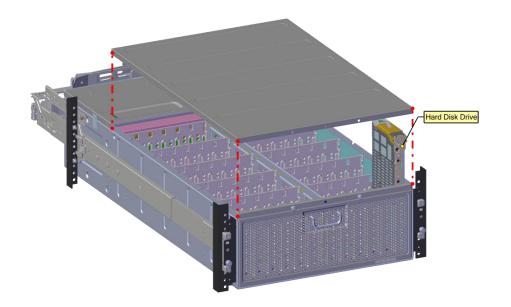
Identification of Assembled Enclosure (Hard Drive Assembly)
